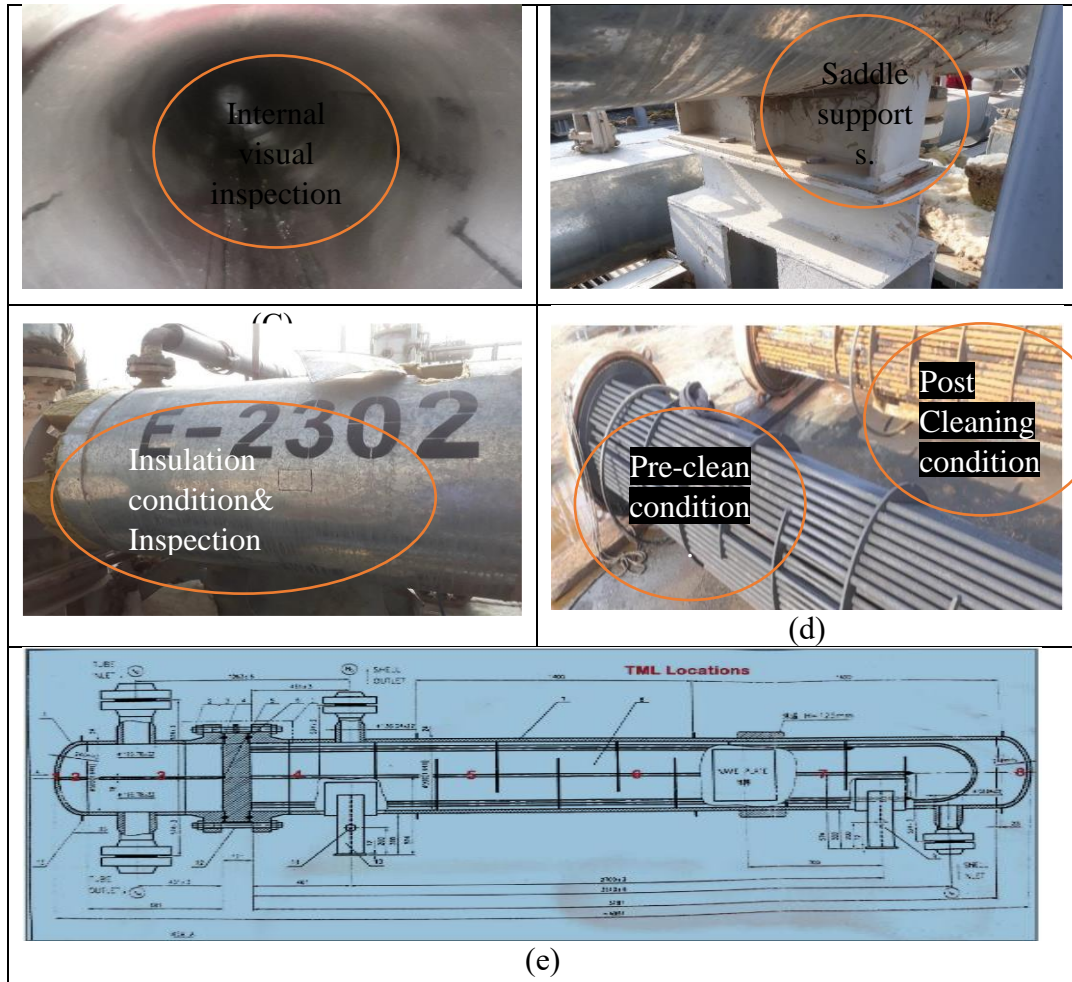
(a) Internal visual inspection, (b) External Visual Inspection, (c) Inspection condition of Insulation material, (d) Pre-& Post cleaning condition of tube bundles, and (e) Inspection measuring locations.
